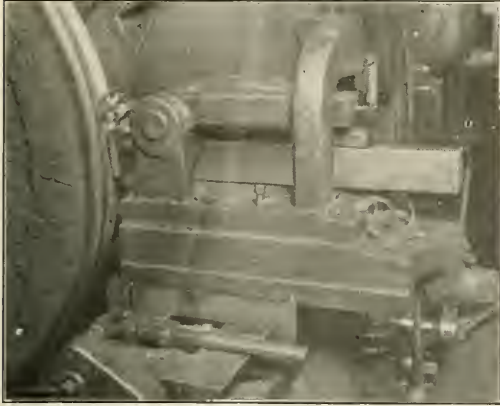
No. 18AA Roughing Tool in Driving Wheel Lathe
